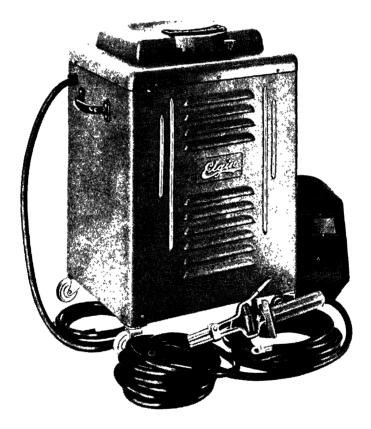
A complete A.C. transformer type arc welder. The adjustment handles are located at the top. This machine has a capacity of 160 amperes (Courtesy of: Borm Manufacturing Company)
